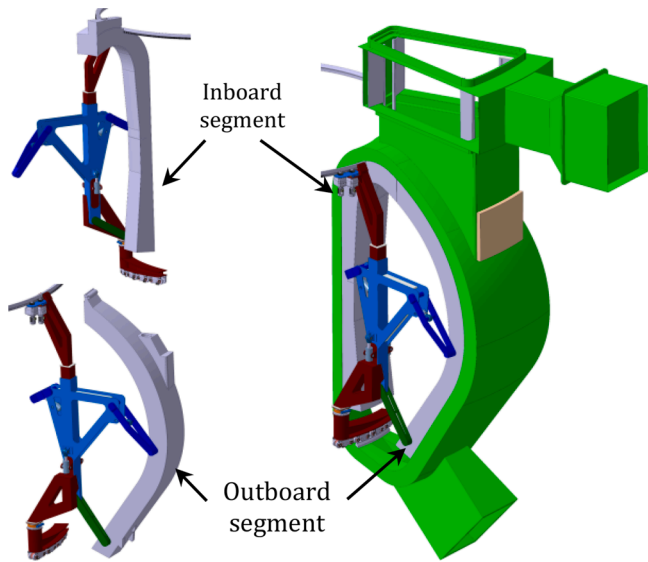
BBTT inside the Vacuum Vessel is able to handle both types of Breeding Blanket.
